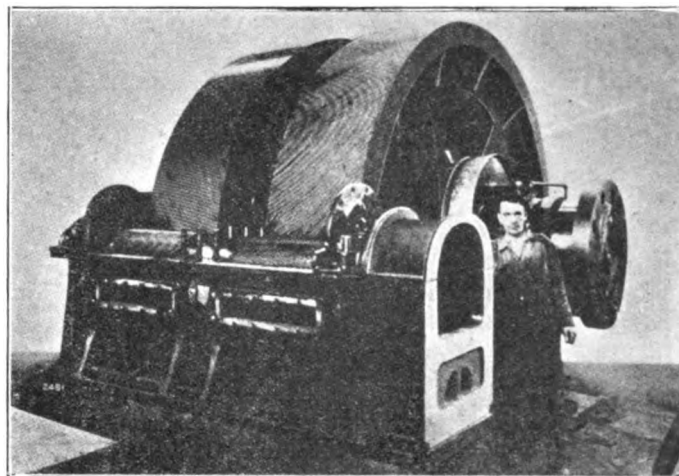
De Laval Turbine Reduction Gear with Cover Removed.
